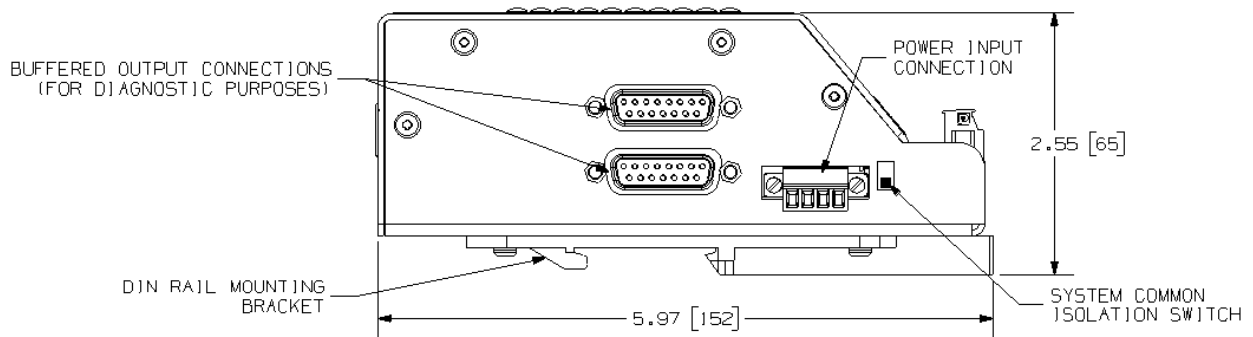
vbOnline Pro - Side View Dimensions in inches [millimetres]
